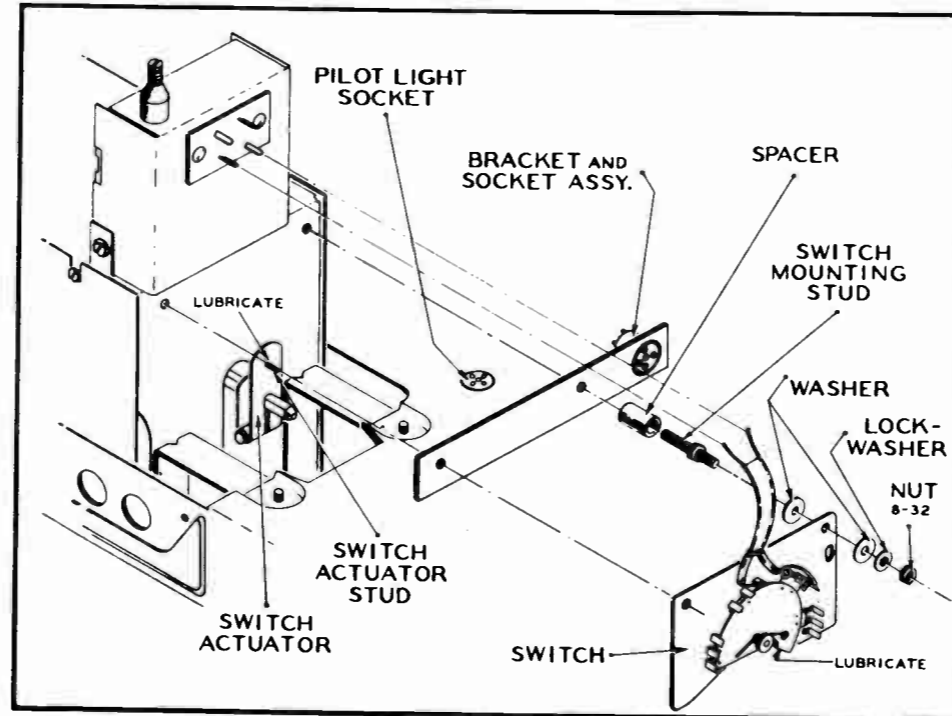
VHF-UHF Change-Over Switch, Mounting Details
